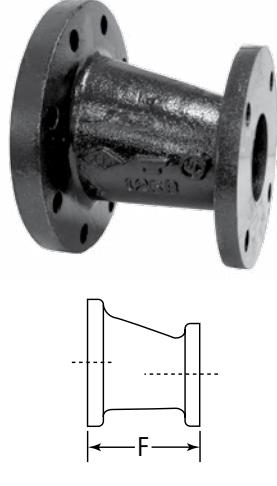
Flanged Concentric Reducer	Size				F	Unit Weight
